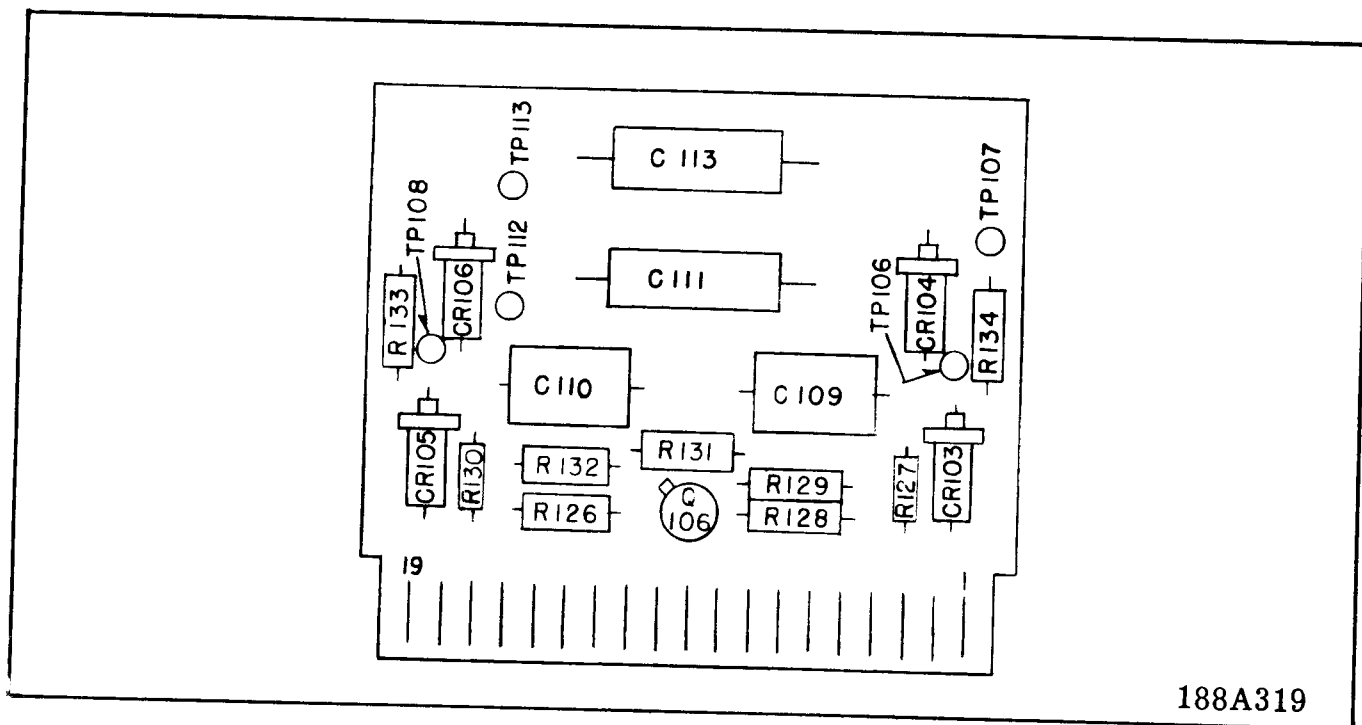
Power Amplifier Printed Circuit - Parts Location
